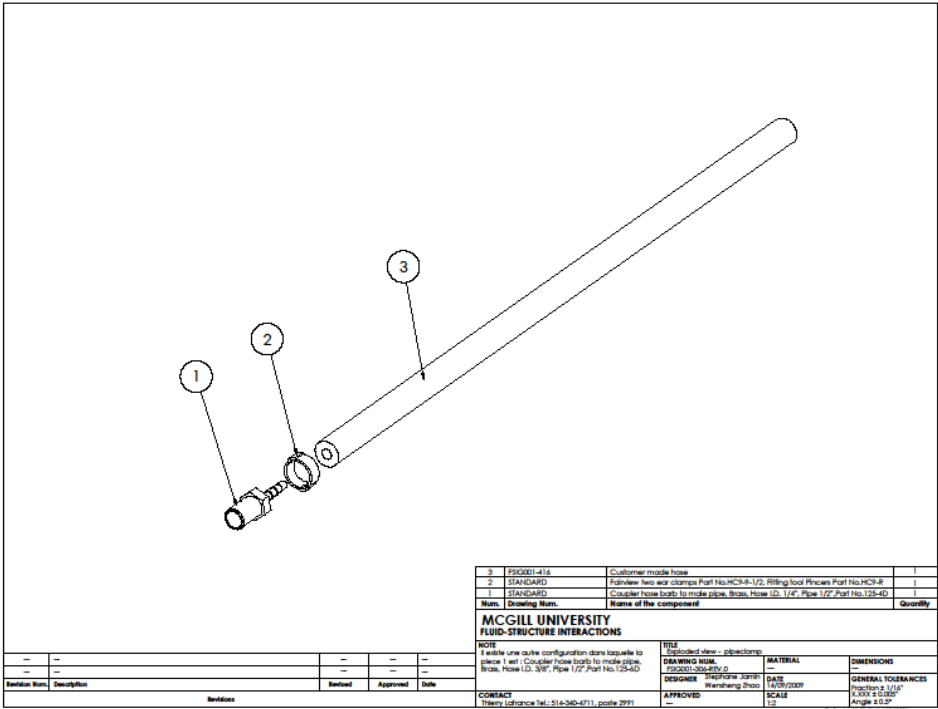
Sub-assembly drawing for the vessel: Clamped pipe
